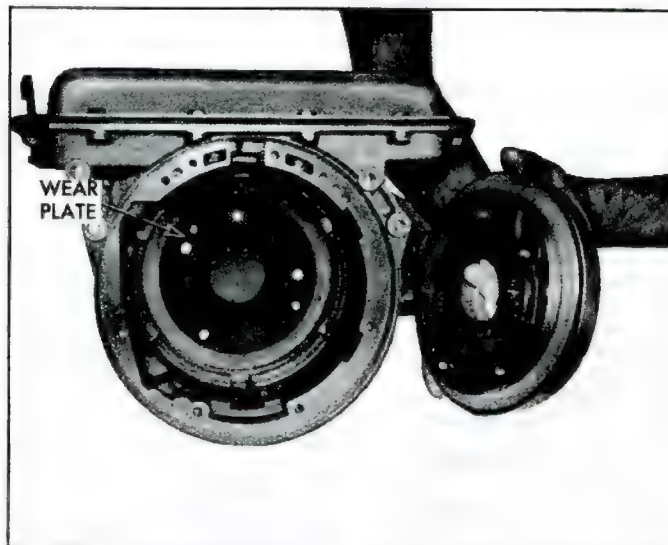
E-28—Removing Rear Pump and Reverse Piston Assembly
